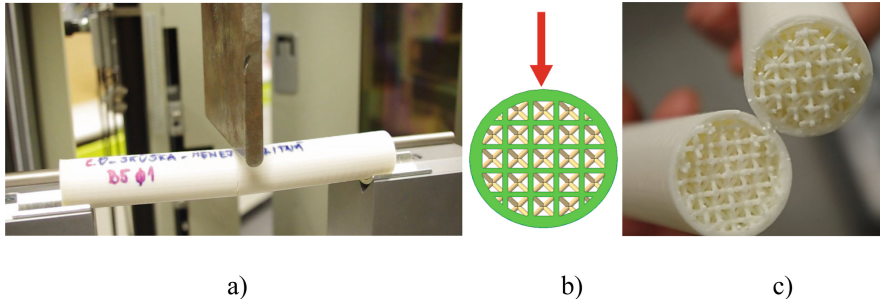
Bending test, a) position of a sample, b) orientation of sample cross-section, c) sample after damage
